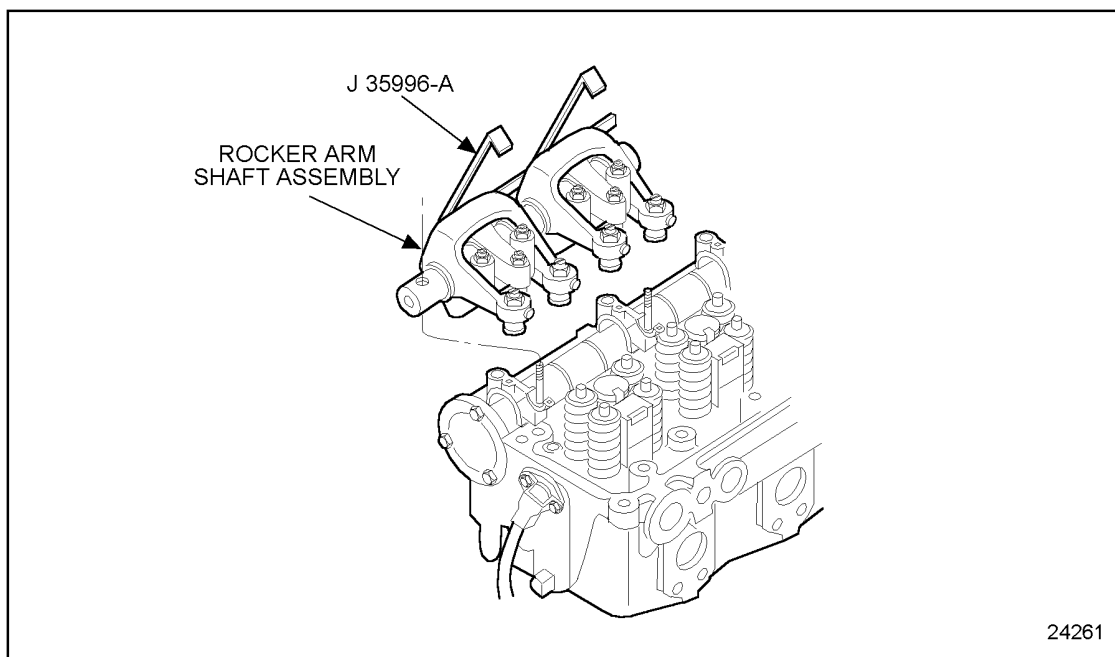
Rocker Arm Shaft Assembly Removal and Installation
